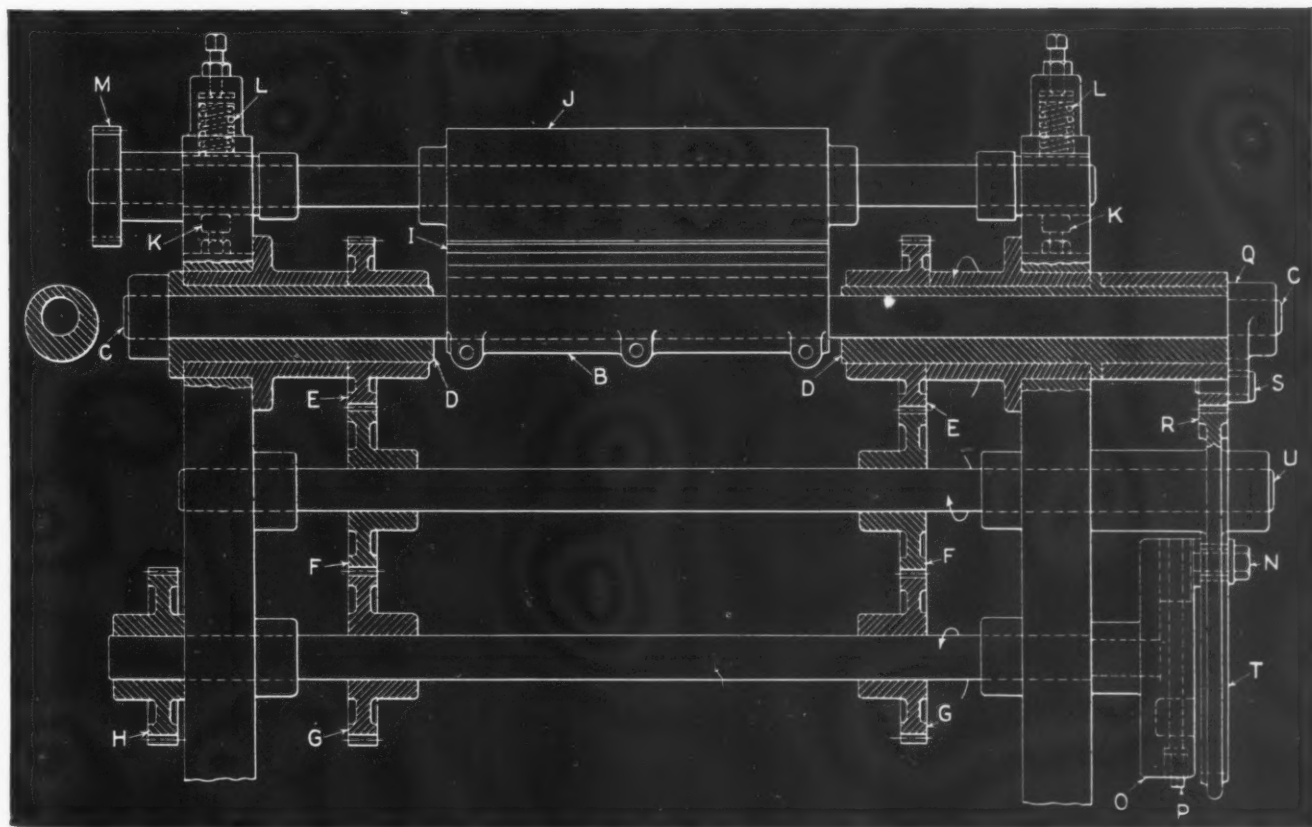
Mechanism that Imparts Modified Oscillating Motion to Paper-cutting Blade
